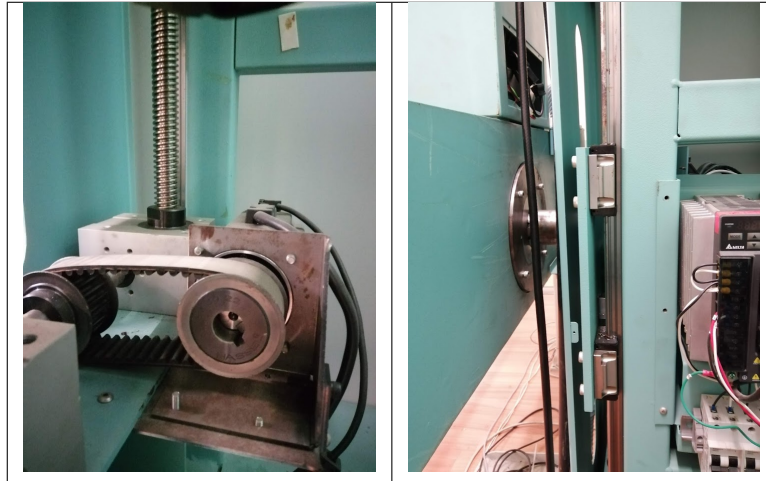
A worm drive is used to move the table top and bottom, B- sliding rails are used to absorb the vibrations.
